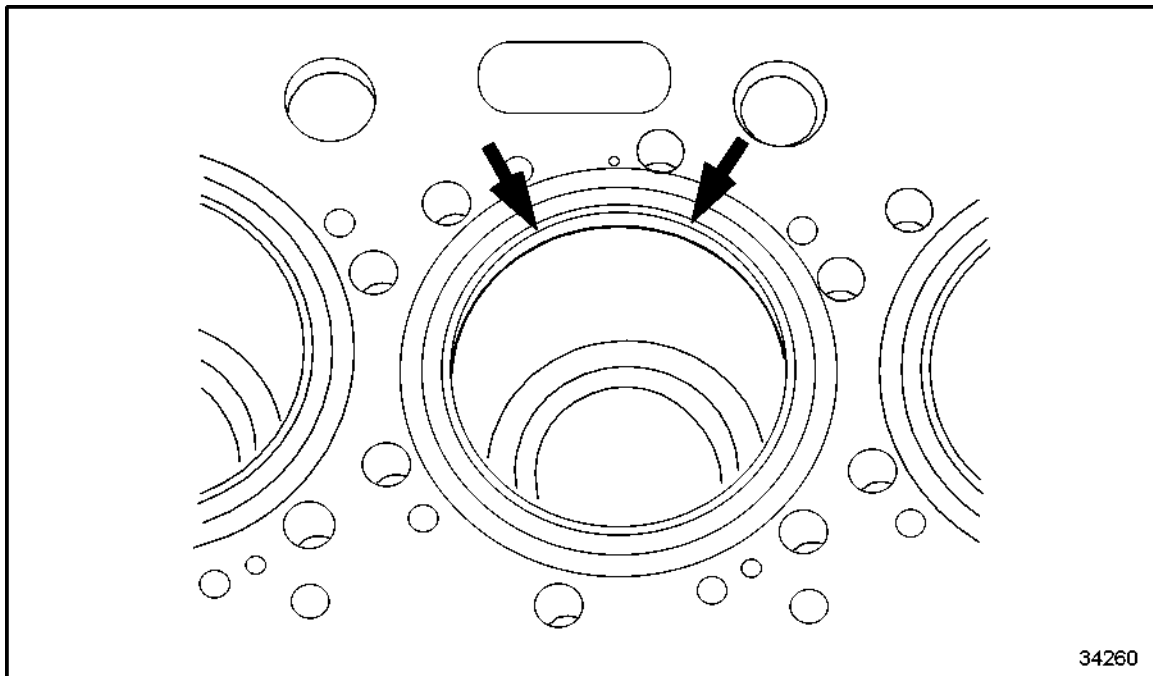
Removing Carbon Scraper Ring (Marine Engines Only)
